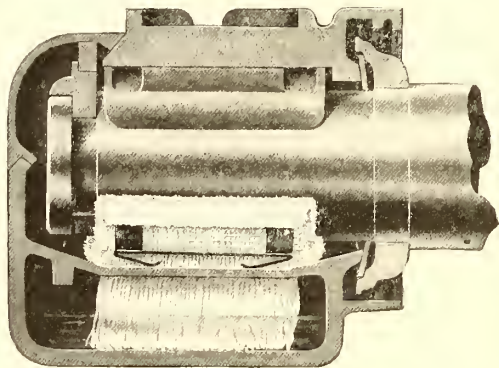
SECTIONAL VIEW OF JOURNAL BOX, SHOWING OILER IN POSITION
